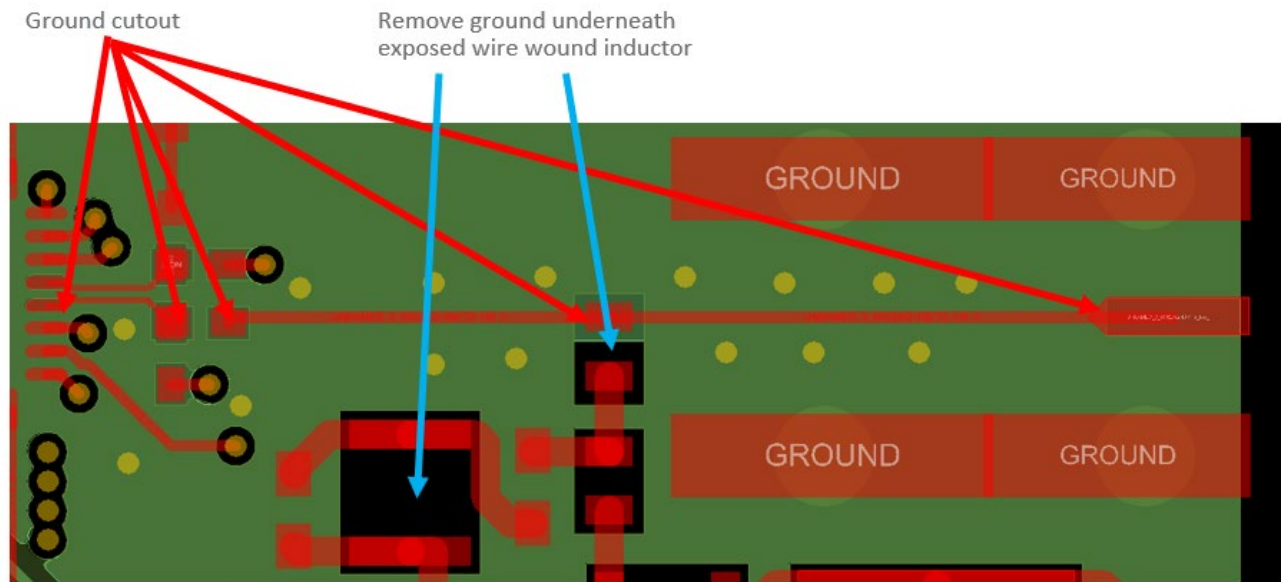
S: PoC Layout Example Showing Single-Layer Ground Cutouts under the IC Pad, AC Coupling Cap, First PoC Component, and Fakra Connector Pad. Full Board Cutout is Shown Under the Wire-Wound Inductors
